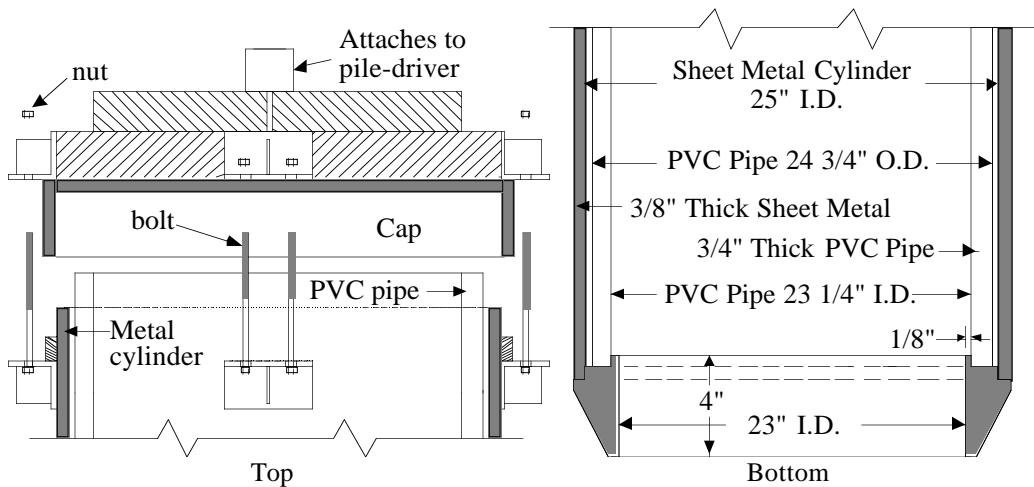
Drawing of cutting bit used to obtain large undisturbed soil cores.
